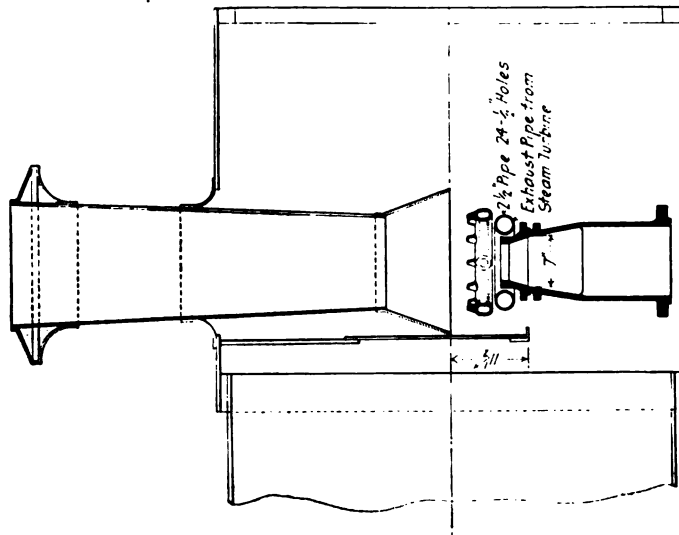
GENERAL ARRANGEMENT OF LOCOMOTIVE FRONT END FOR BURNING PULVERIZED FUEL
